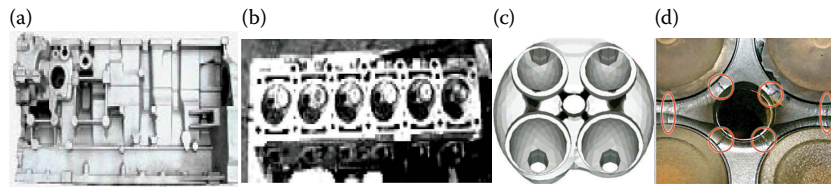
(a) Engine block, (b) cylinder head, and (c) thermal fatigue cracks in an A319 cylinder head, the circles indicate the inter-valve regions between where cracks occur^[8]
